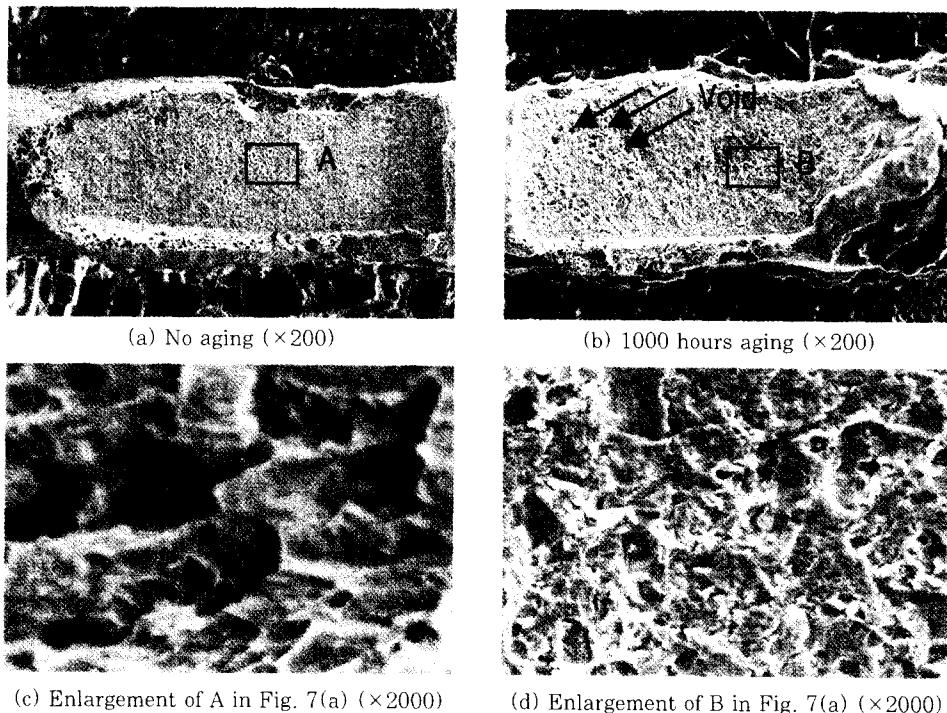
Fracture surface of Sn/Ag solder joints
